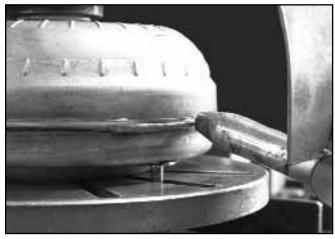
The CNC lathe creates parallel surfaces for your converter.
